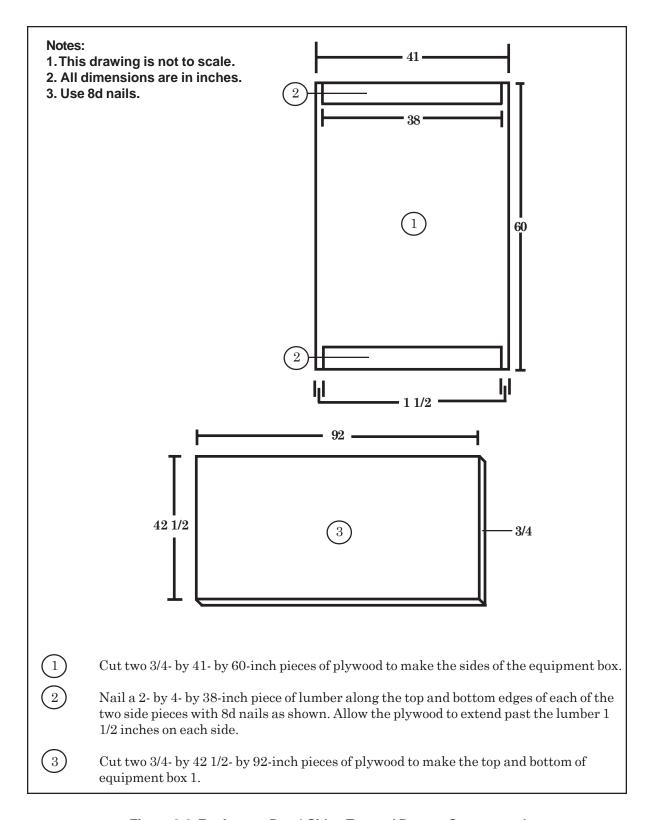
Equipment Box 1 Sides, Top and Bottom Constructed
